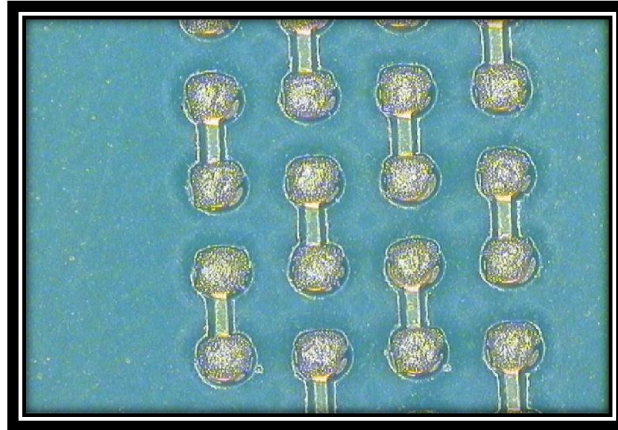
Corrected Alignment Solder Paste Print after X-Y Realignment
